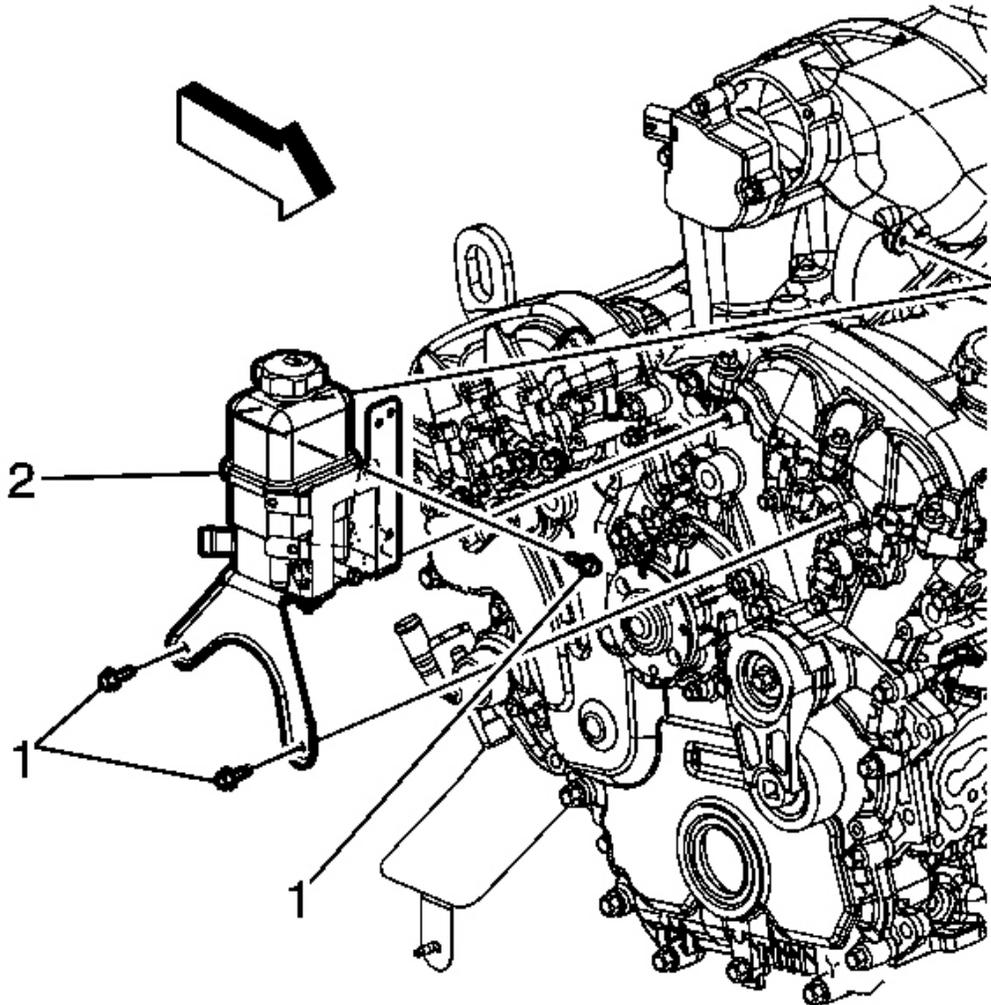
Identifying Remote Power Steering Fluid Reservoir, Bracket & Bolts
